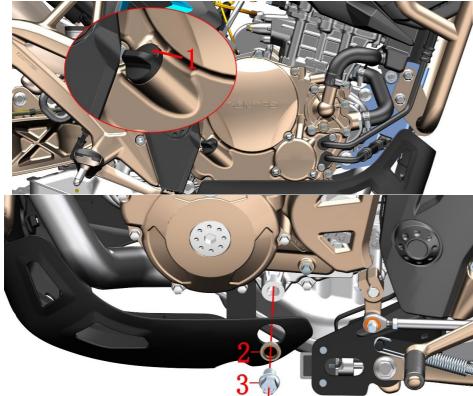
C	COOLING SYSTEM Change engine oil		CHK
